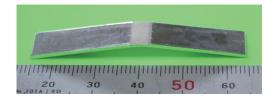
Example of bend workpiece (A1100, t = 1 mm).
